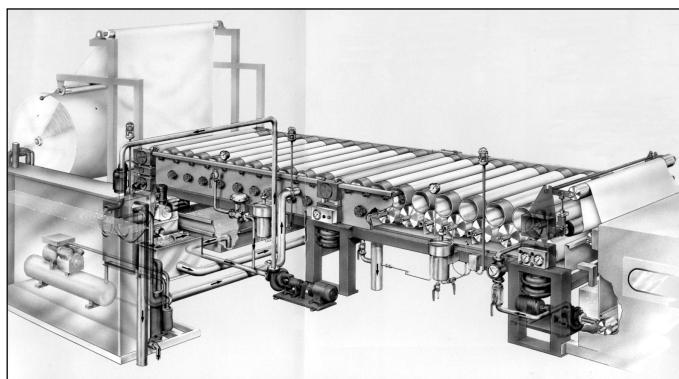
Chainless mercerising machine (Brugman Machinefabriek)
